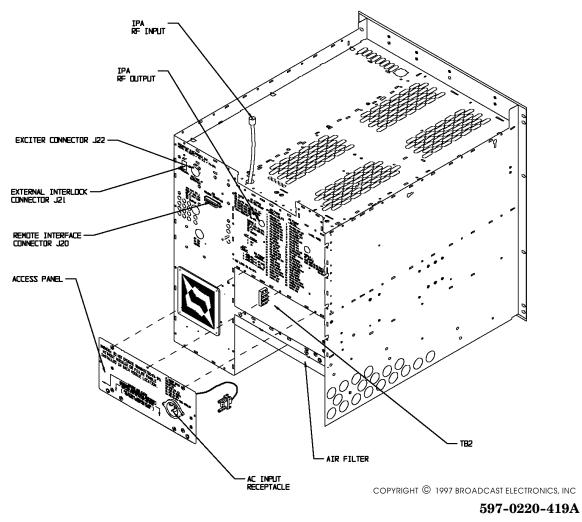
IPA COMPONENT LOCATOR (Sheet 2 of 2)
